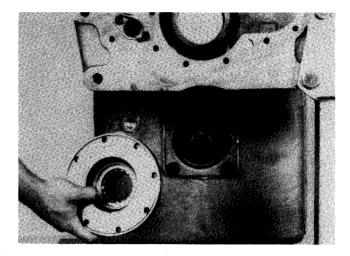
Remove front output flange nut, washer, "O" ring and flange. See 6 & 8 Speed Section for Range Shift Output Shaft Removal.
